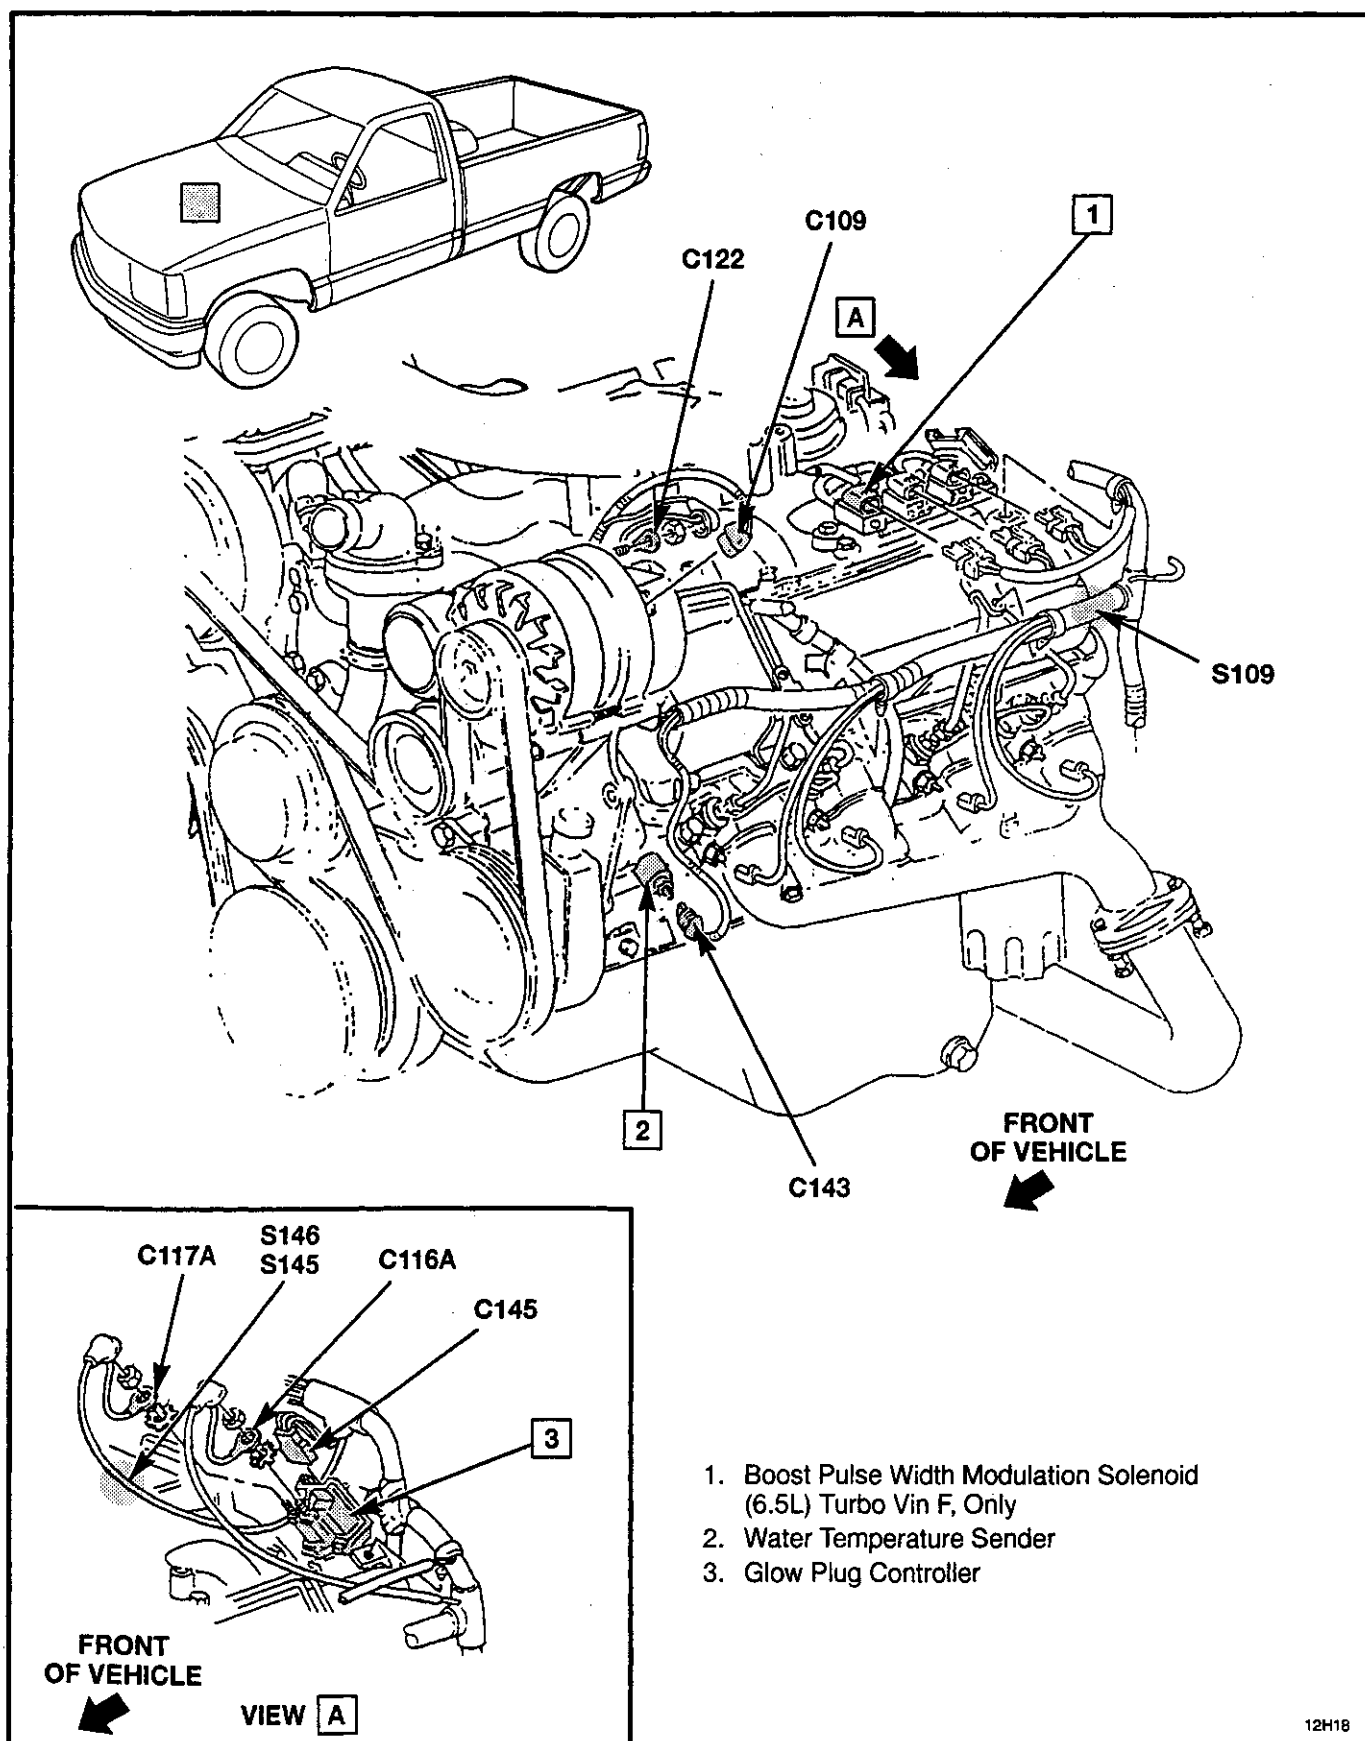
6.5L Diesel Engine Wiring, LH Side
